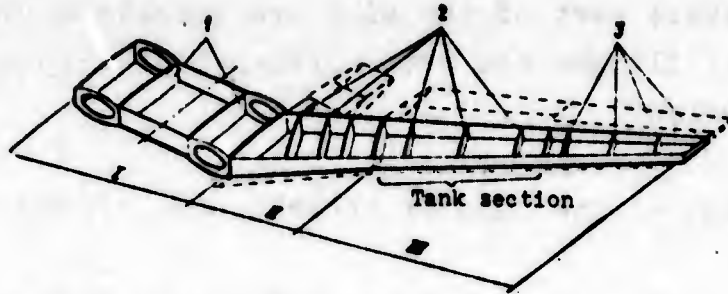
The swept monocoque wing of the TU-124 aircraft (only the reinforced ribs are shown): I - center section; II - middle part of the wing; III - removable part of the wing; 1 - inside ribs; 2 - flap suspension assemblies; 3 - aileron suspension assemblies.
